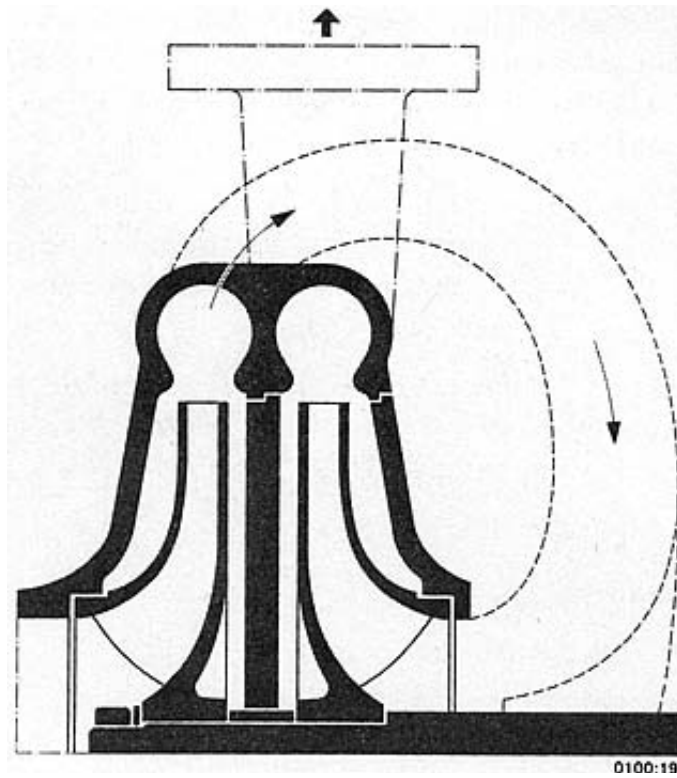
Axial force, two stage back-to-back impeller arrangement
